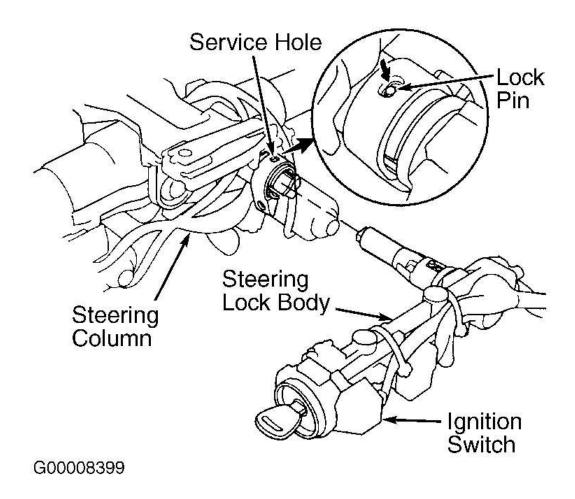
Removing & Installing Steering Lock (3.5RL) Courtesy of AMERICAN HONDA MOTOR CO., INC.
